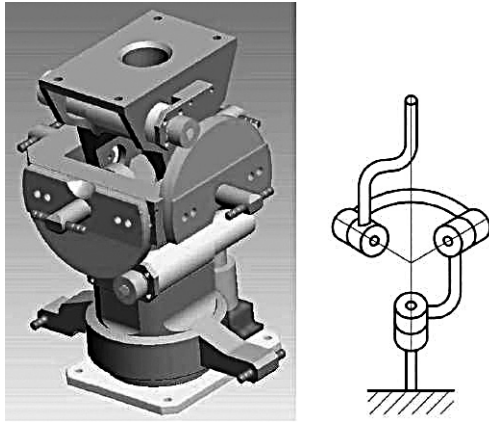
Engineering drawing and scheme of the 3DOF hip
